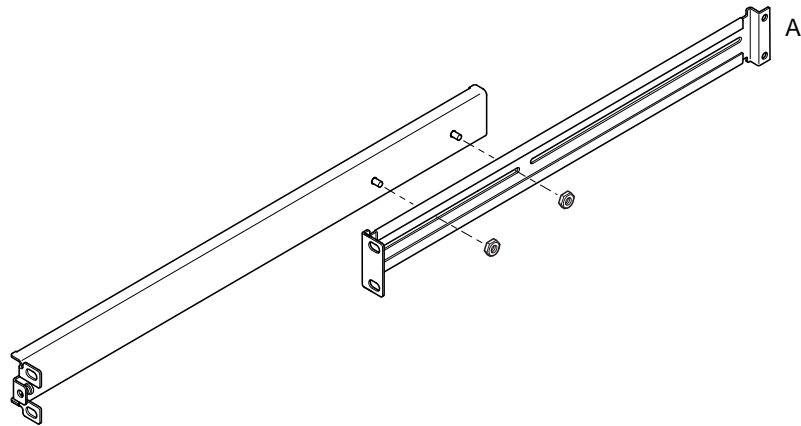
Positioning the Slide Mounts for a Sun StorEdge 72-Inch Tall Rack
